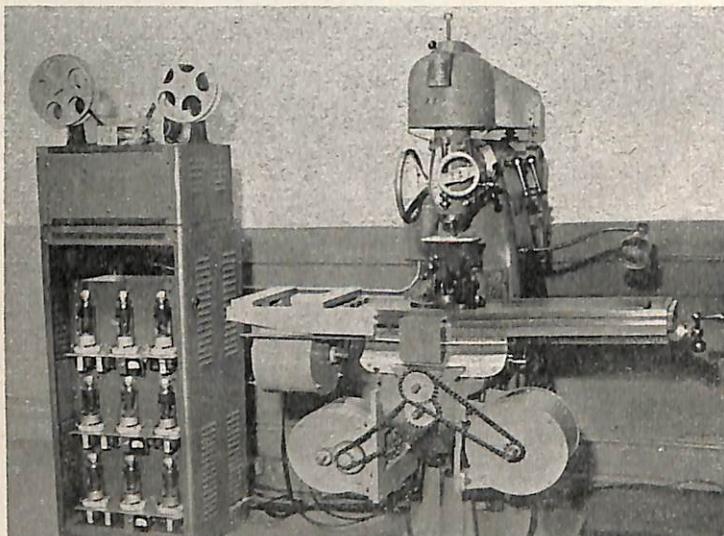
Milling Machine equipped with an Automatic Control System in which Three Step-Motors are employed to move the Tool and Workpiece
